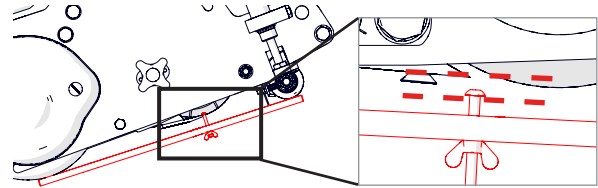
C - Position the setting bar and observe distance between the top of the shear blade and bottom on the bolt head. In this example, the bolt head is below the shear blade, indicating the machine cut height is currently too high and therefore needs lowering.
